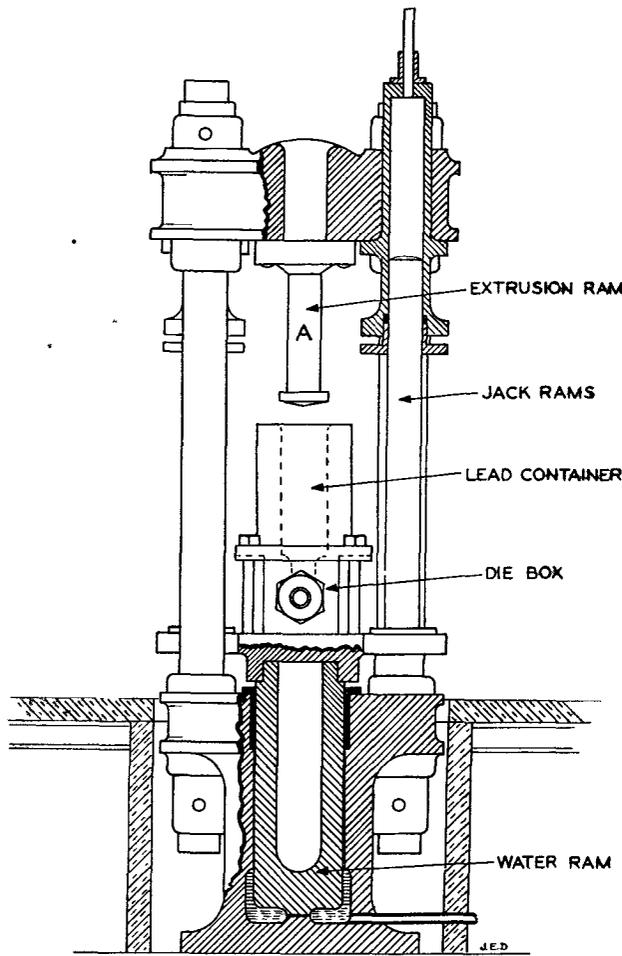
SINGLE-RAM, UPRIGHT TYPE LEAD PRESS.
